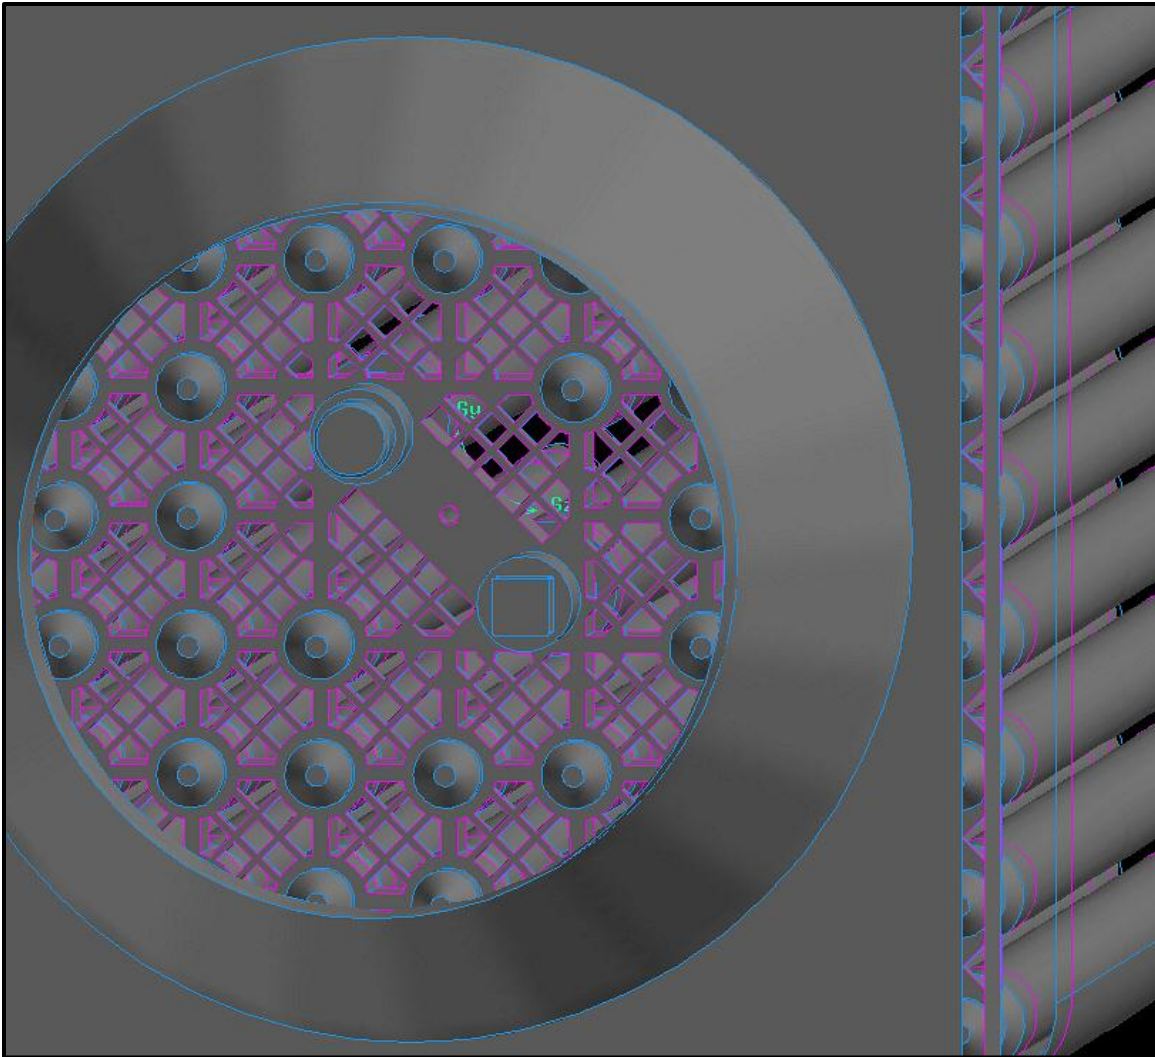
Lower fuel assembly segment including lower tie plate and fuel rods imported into GAMBIT from SolidWorks CAD solid model; several surfaces are made transparent in order to enhance the visual detail.
